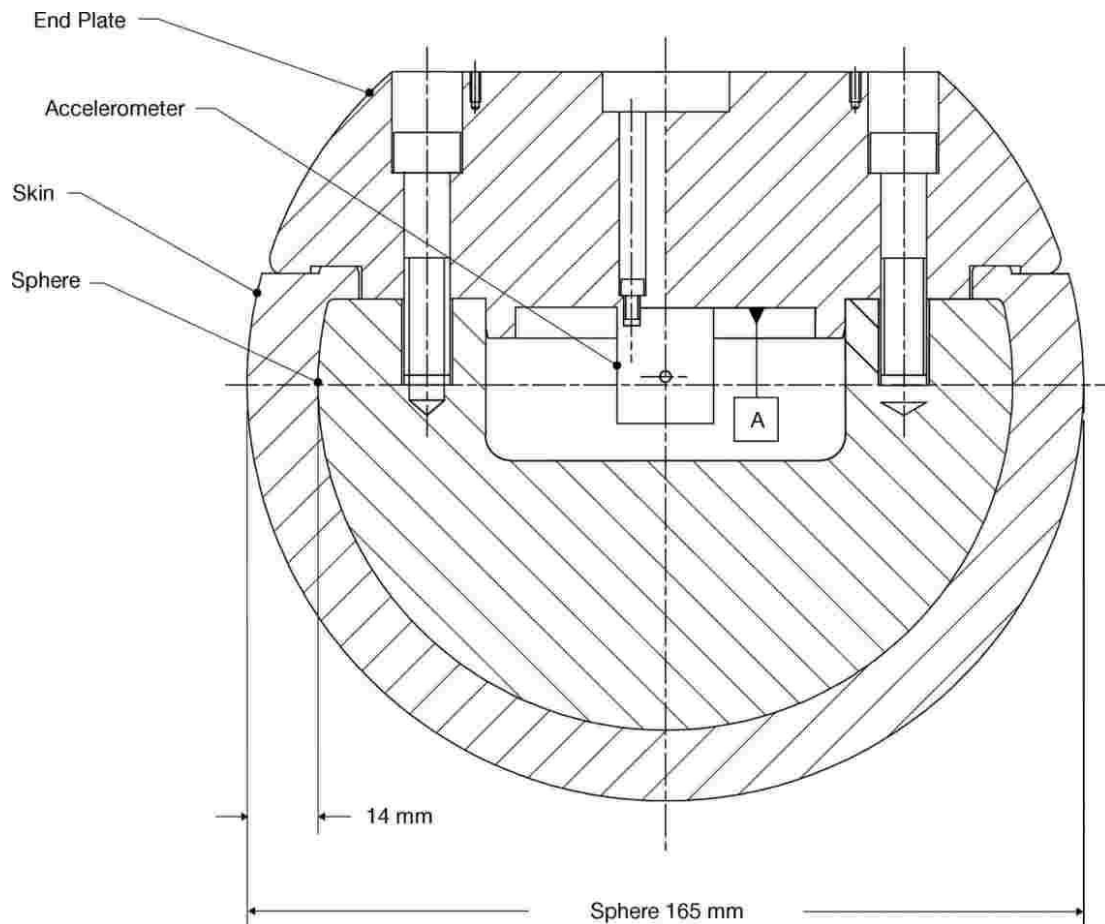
Cross-section of the adult headform impactor. [13]
